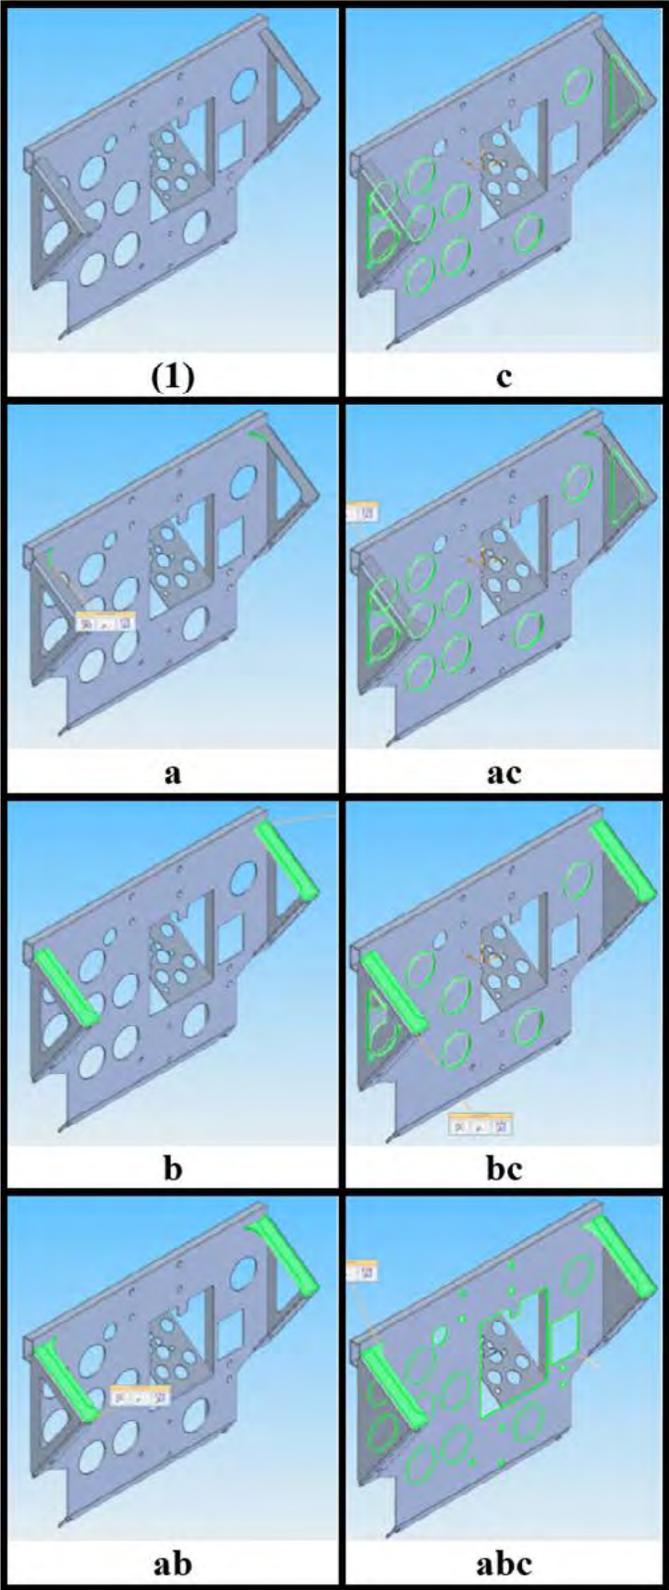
CAD models for 8 unique design alternatives of the mounting bracket
